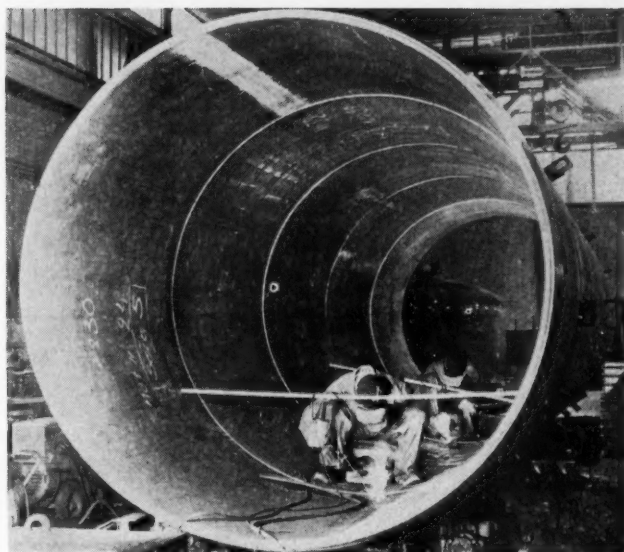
Manual arc welding of the cylindrical shell of a solid stainless-steel reactor at a design pressure of 1,450 p.s.i.
